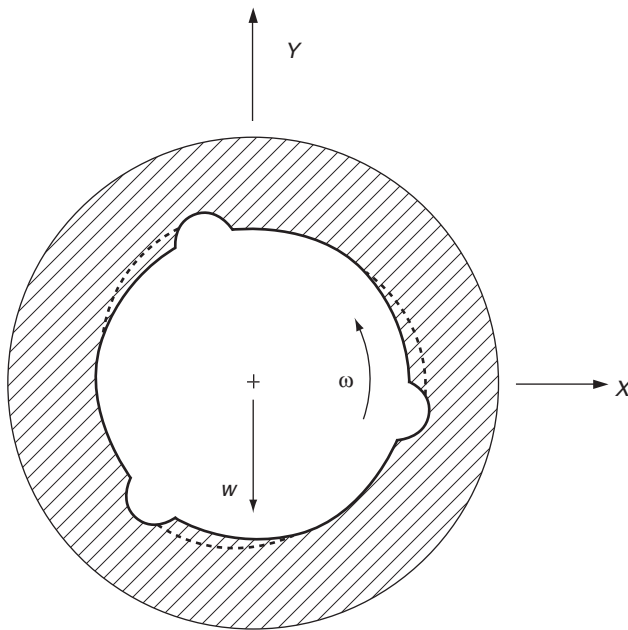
Taper Land Bearing with Three Tapered Pockets
